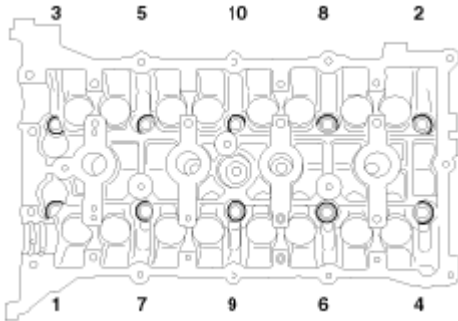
Identifying Cylinder Head Bolts Remove Sequence
